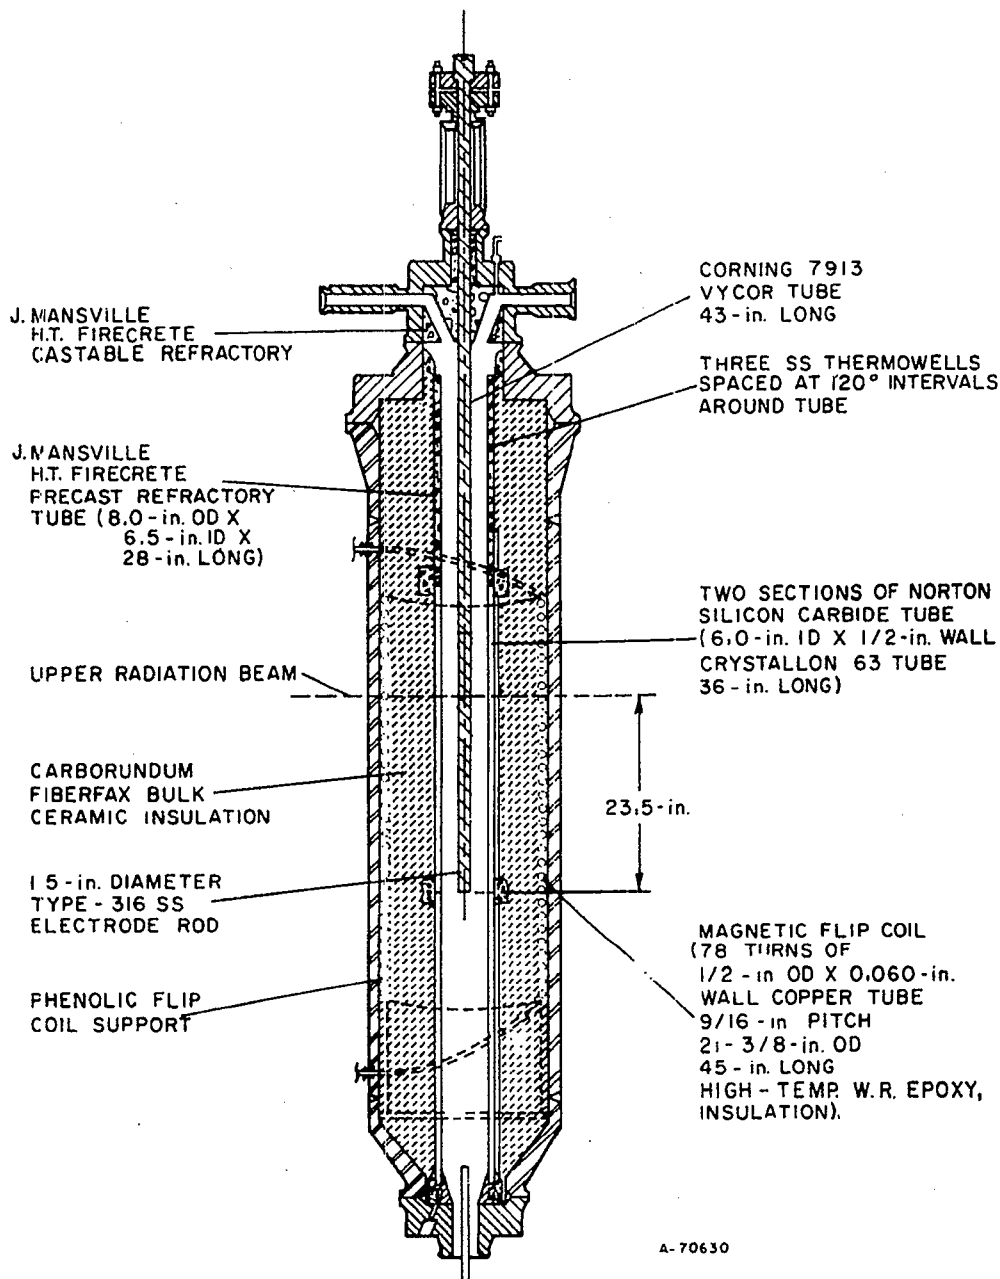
1-23. CUTAWAY VIEW OF REACTOR VESSEL WITH "FLIP COIL" INSTALLED
